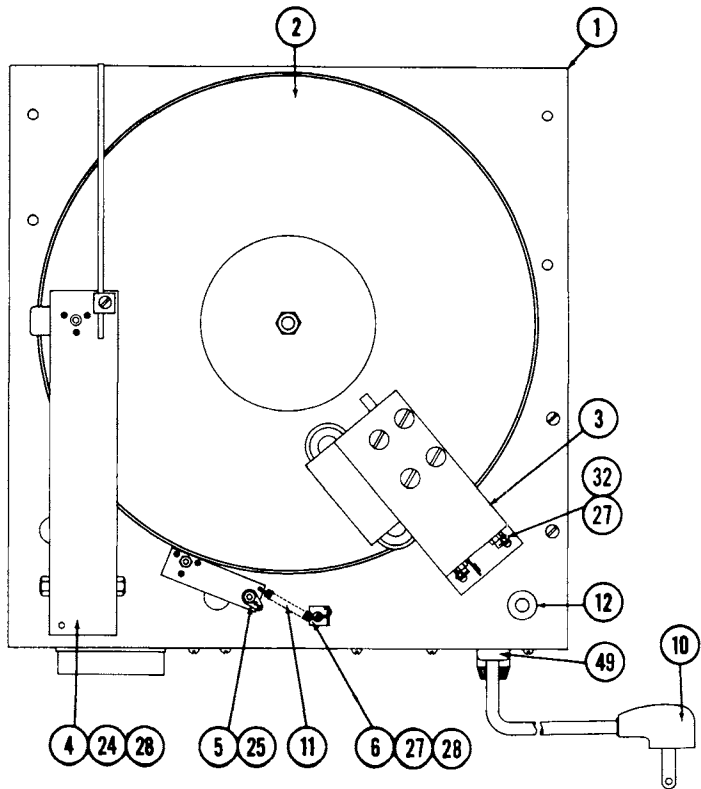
Motorboard Wiring, WW-4705-1 (Part of Final Assembly, Figure 1).
